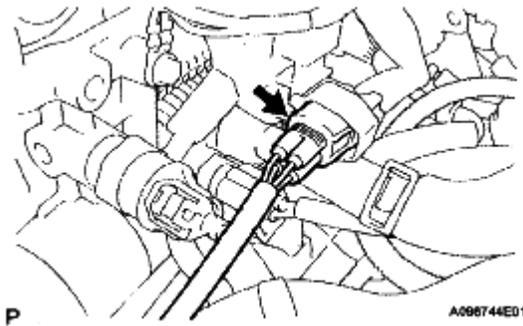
Locating Air-Fuel Ratio Sensor Connector
